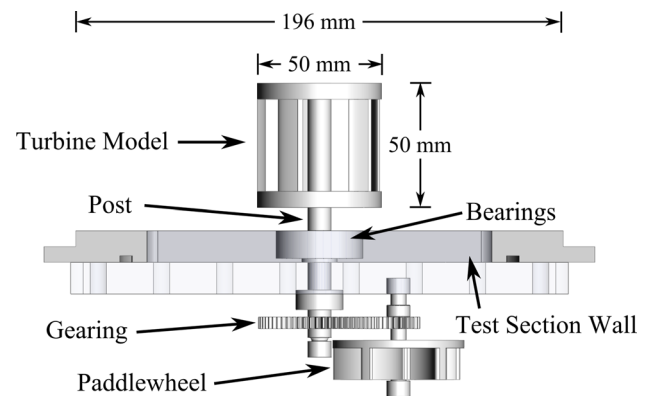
Schematic of hydraulic spinning mechanism with paddlewheel and gearing. Gear ratio is changed to achieve desired TSR. Paddlewheel housing surrounds gearing and paddlewheel and is omitted for clarity
